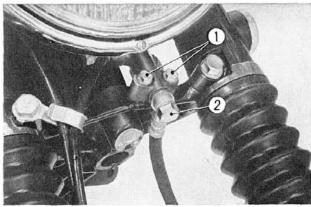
① Joint mounting bolt ② Joint bolt
